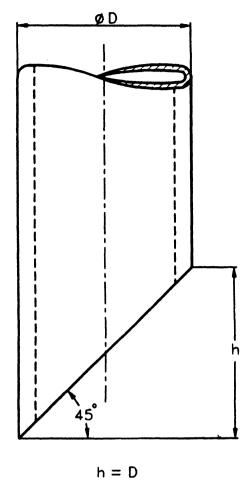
DRAWING OF BOTTOM OF DIP TUBE IN CYLINDERS FOR LIQUID OFFTAKE
